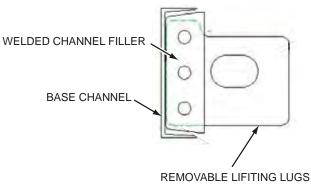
REMOVE AND REPOSITION SHIPPING SPLIT ANGLE
